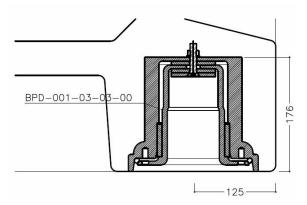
Cross-section of longitudinal floor beam of the unit.
